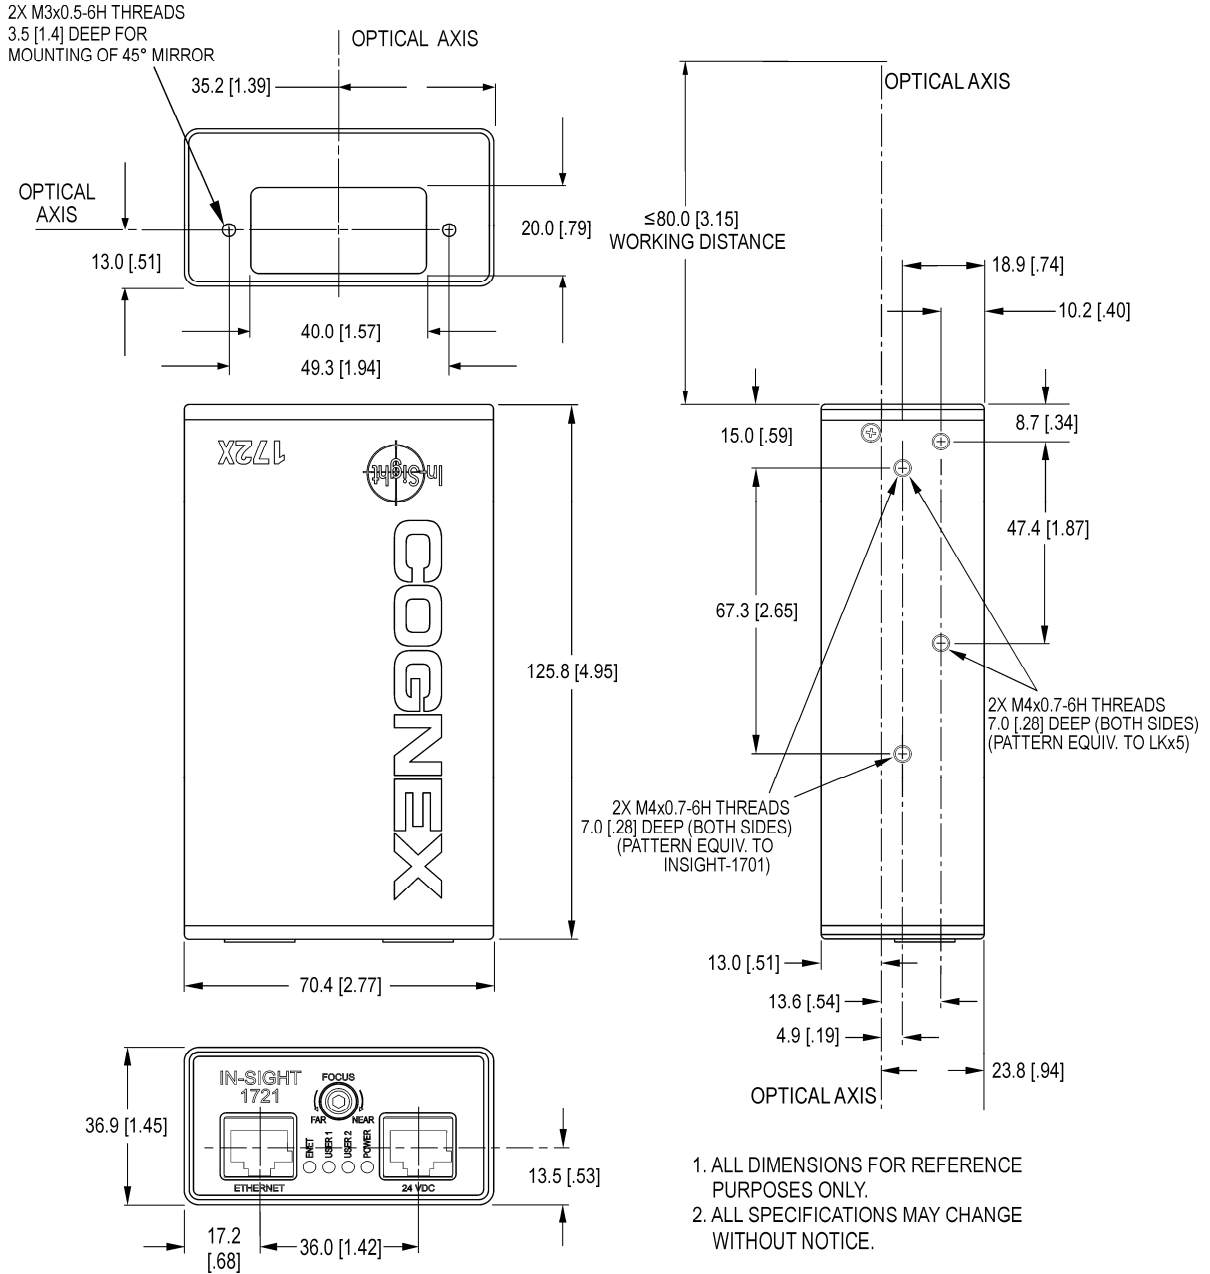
In-Sight 1720 Series Wafer Reader Dimensions
